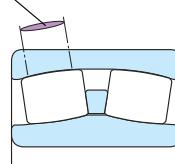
Typical Failure Mechanism of Roll Support Bearing in Continuous Casting Machines
